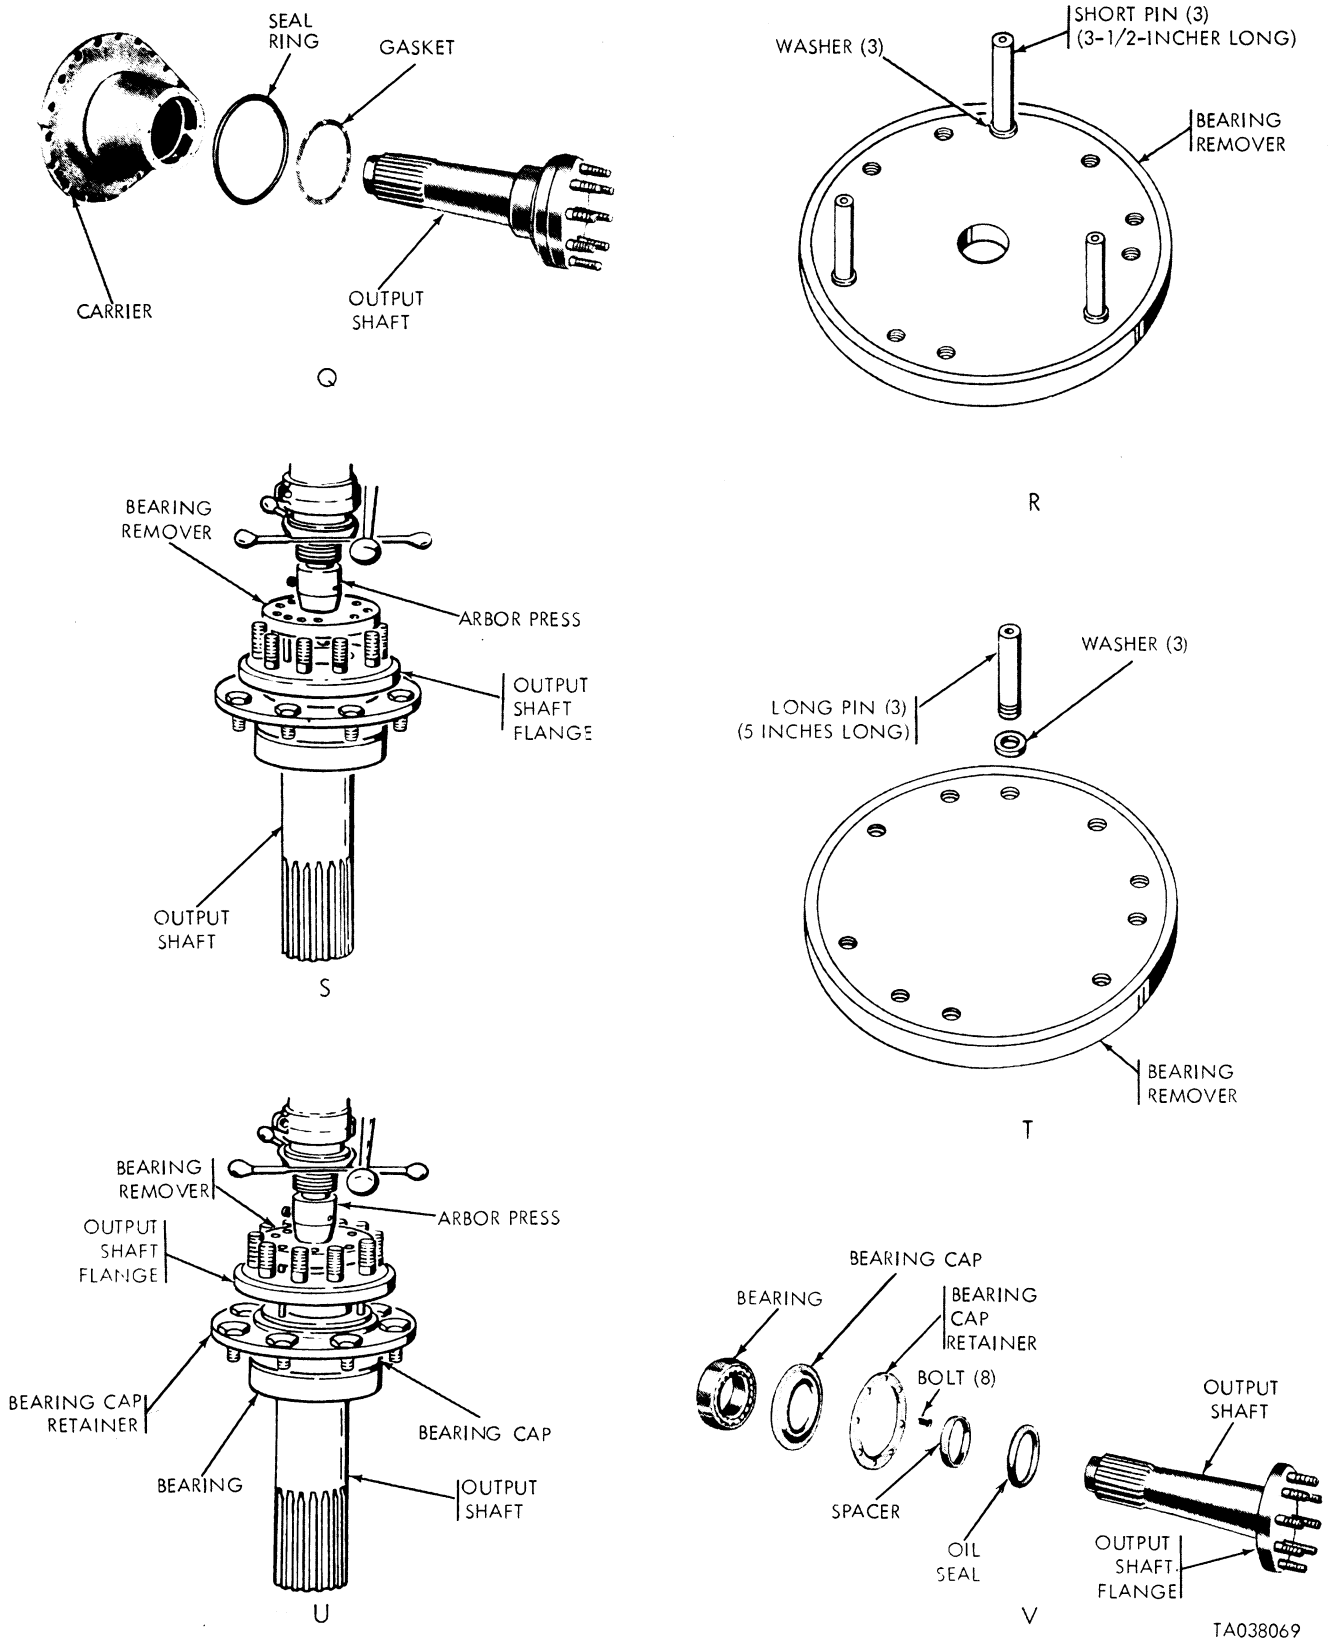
Final drive disassembly and assembly (sheet 4 of 4).
